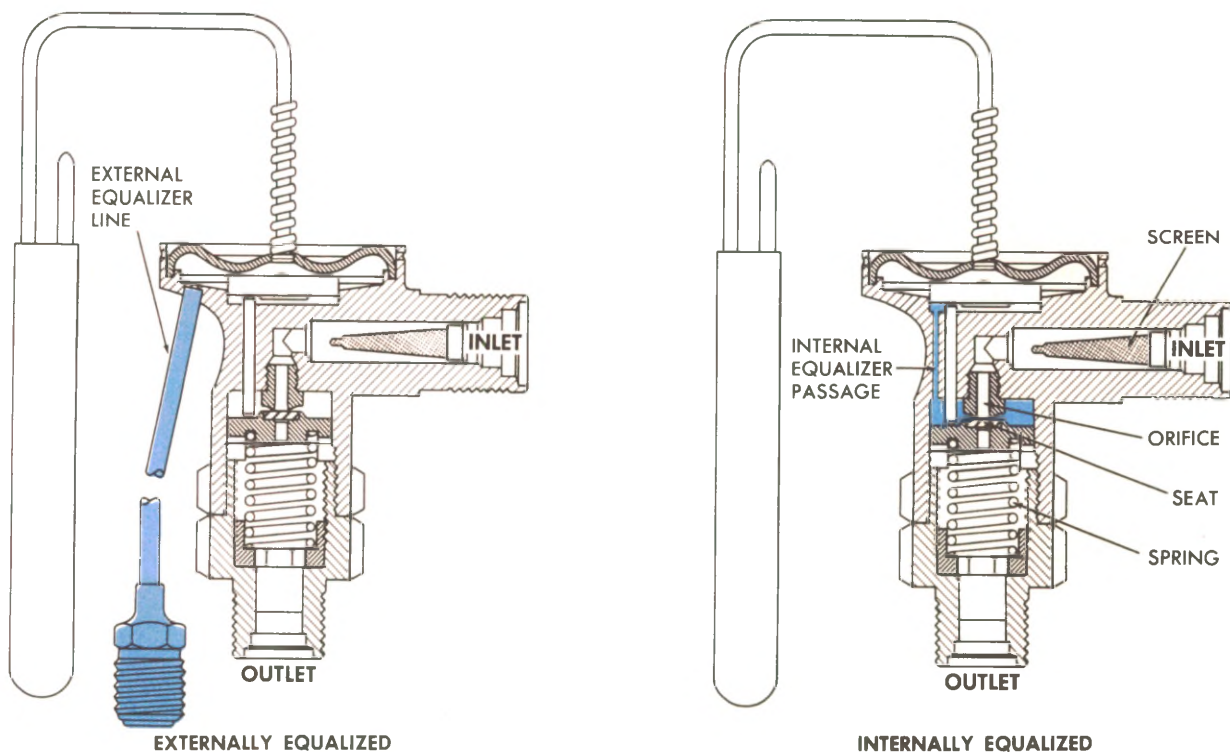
Thermostatic Expansion Valves — Cross Section View
